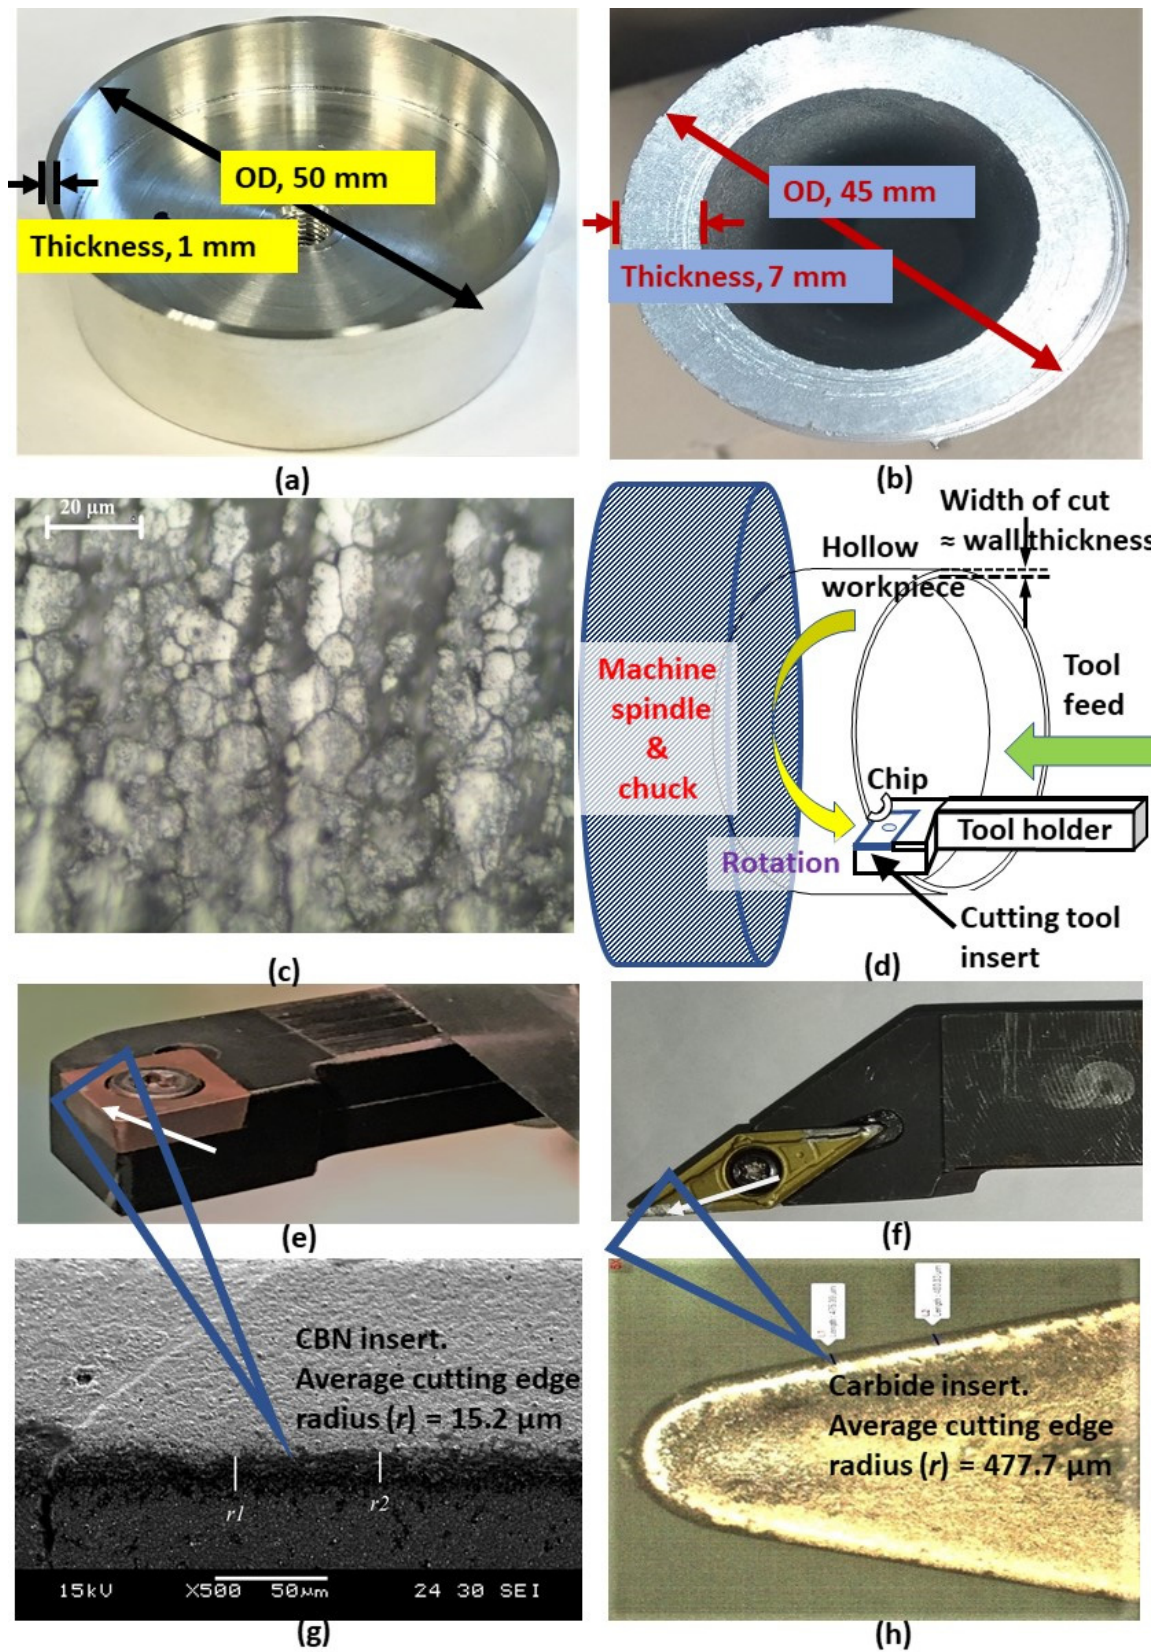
Al alloy workpiece and cutting tool insert used in micromachining in the Toshiba ULG-100C(H³) ultra-precision lathe (a,e,g) and macro machining in CS6266B conventional lathe (b,f,h) with microstructure (c) and cutting scheme (d).
